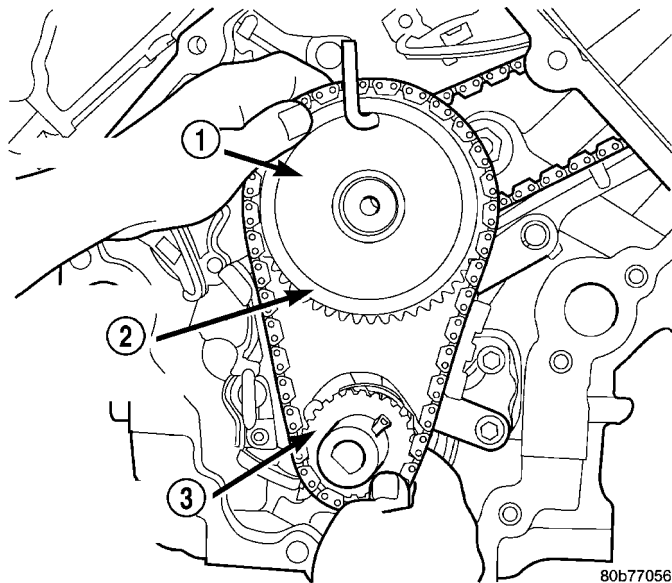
Installing Idler Gear, Primary and Secondary Timing Chains
